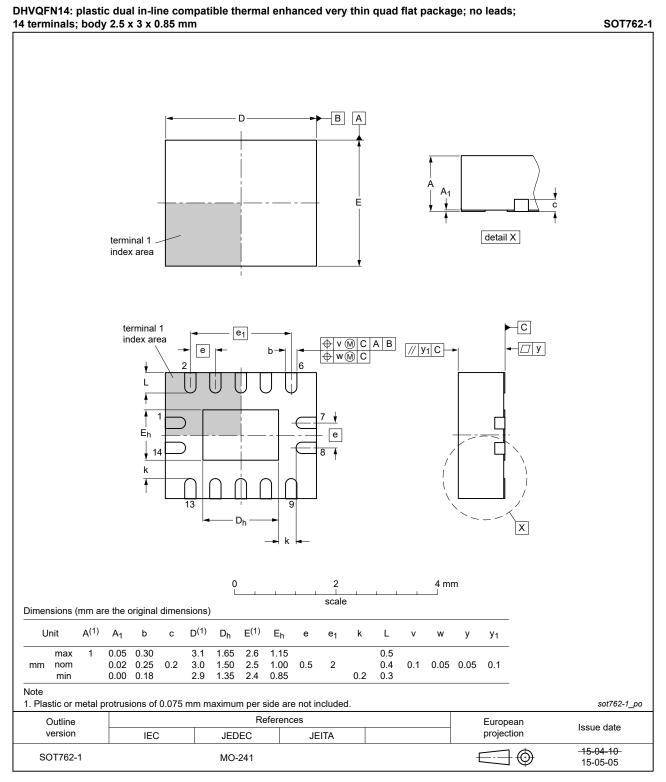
Package outline SOT762-1 (DHVQFN14)
